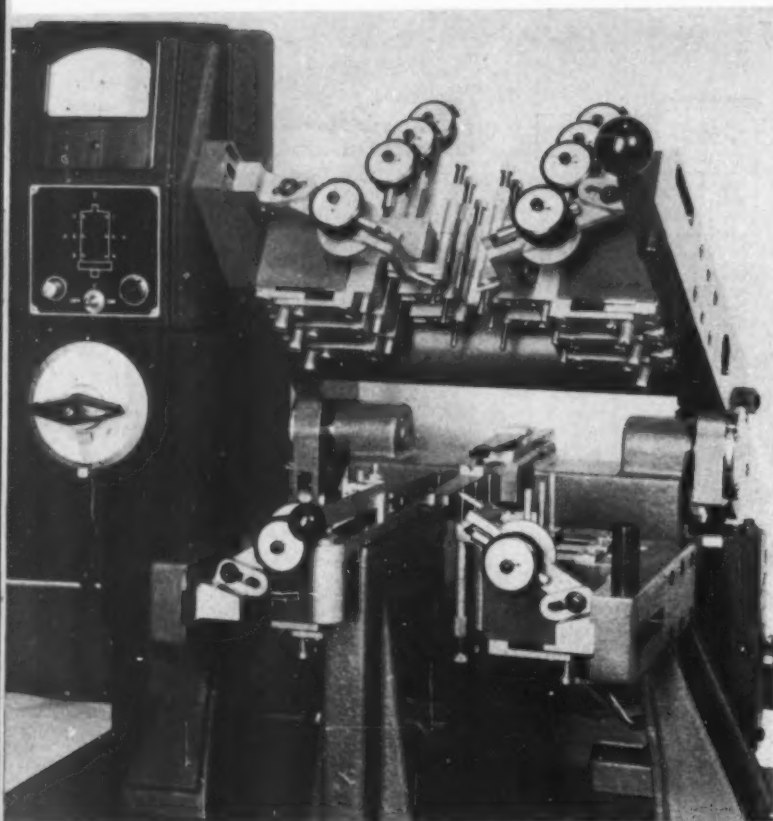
Blade inspection gage for inspecting precision forged blades before further processing
